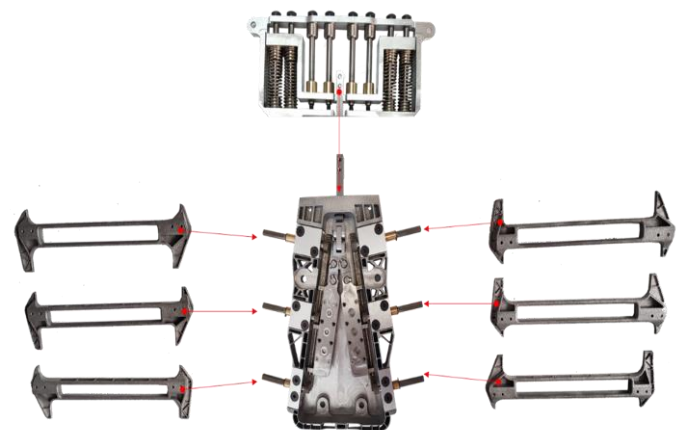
Assembly scheme of the flap supports and the spring assembly frame.
